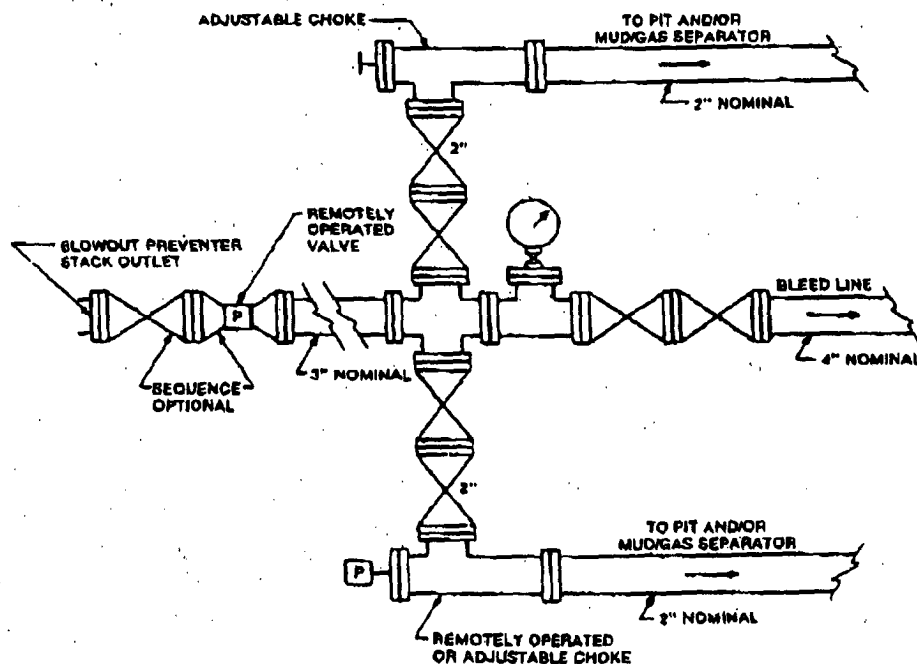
Typical choke manifold assembly for 5M rated working pressure service — surface installation.
